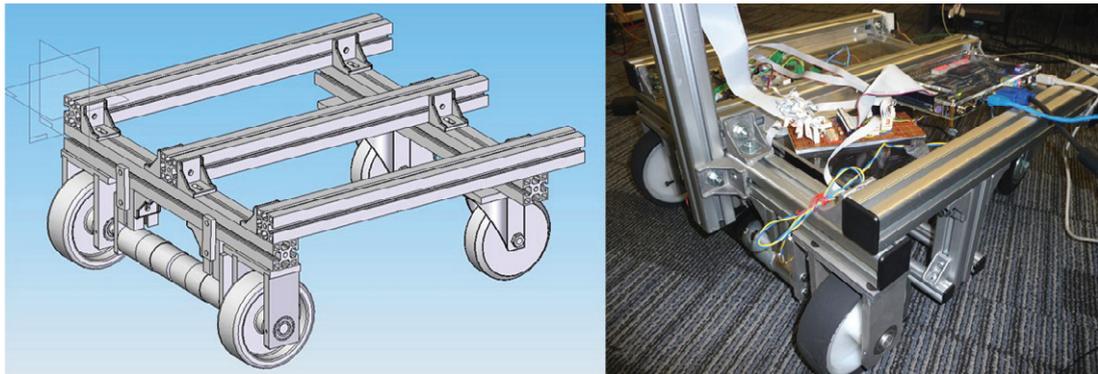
Initial isometric view of the trolley in CAD followed by the resultant physical assembly after iterative co-design and development.
